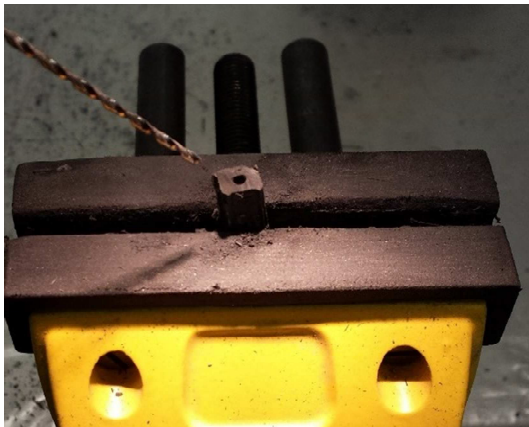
Drilling CFRP piece to insert a thermocouple.
